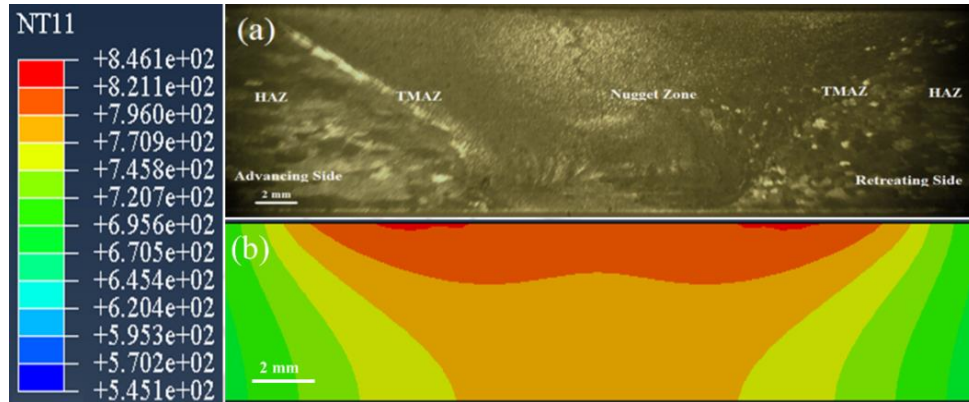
Comparison of simulated and experimental measured weld zone at welding condition of 815 rpm, 63 mm/min weld speed without preheating.
